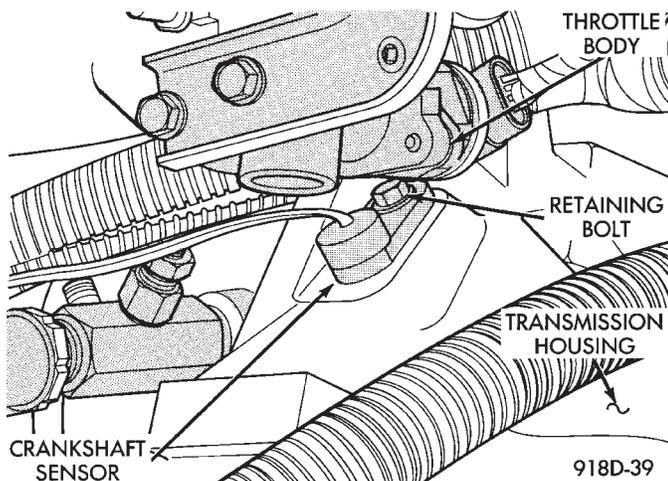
Crankshaft Sensor Service—Turbo III Engine
